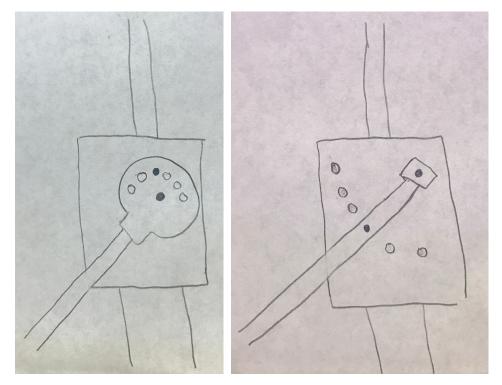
(Left) Alternate Knee joint design drawing Figure 10: (Right) Final Knee joint design drawing
